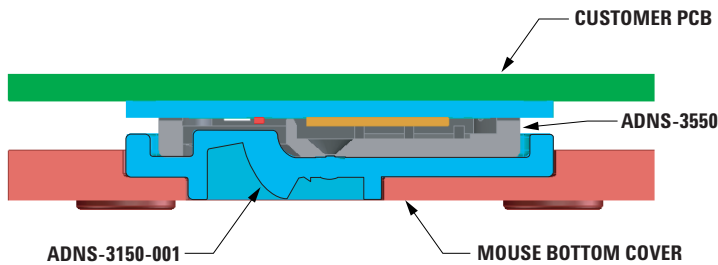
2D assembly drawing of ADNS-3552 (mounted on the bottom side of customer PCB)
